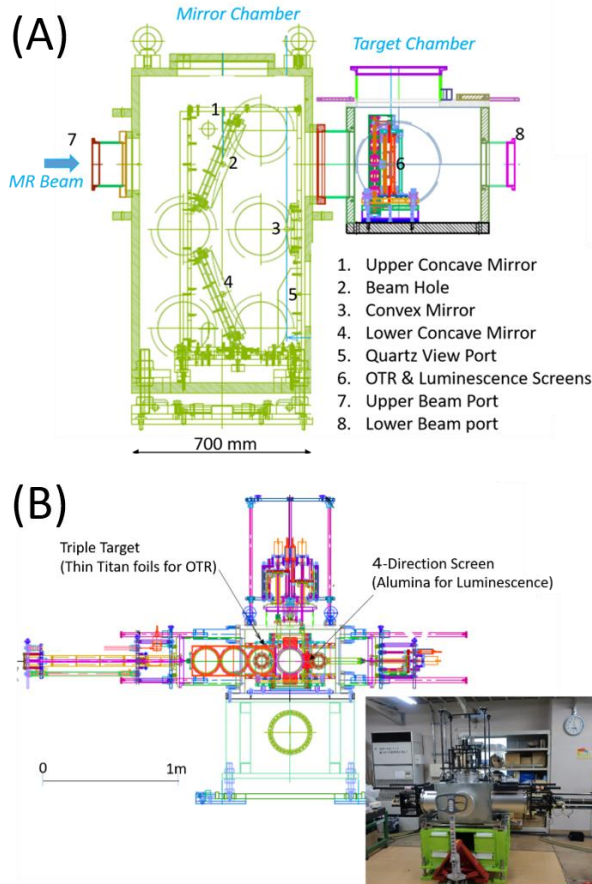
Cross-sectional views of the Equipment, (A) side, (B) front.
